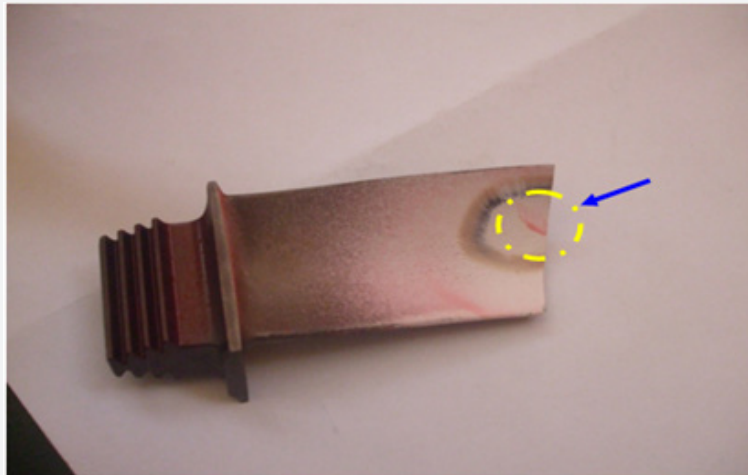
Macro view of a crack formed in a gas turbine blade.
